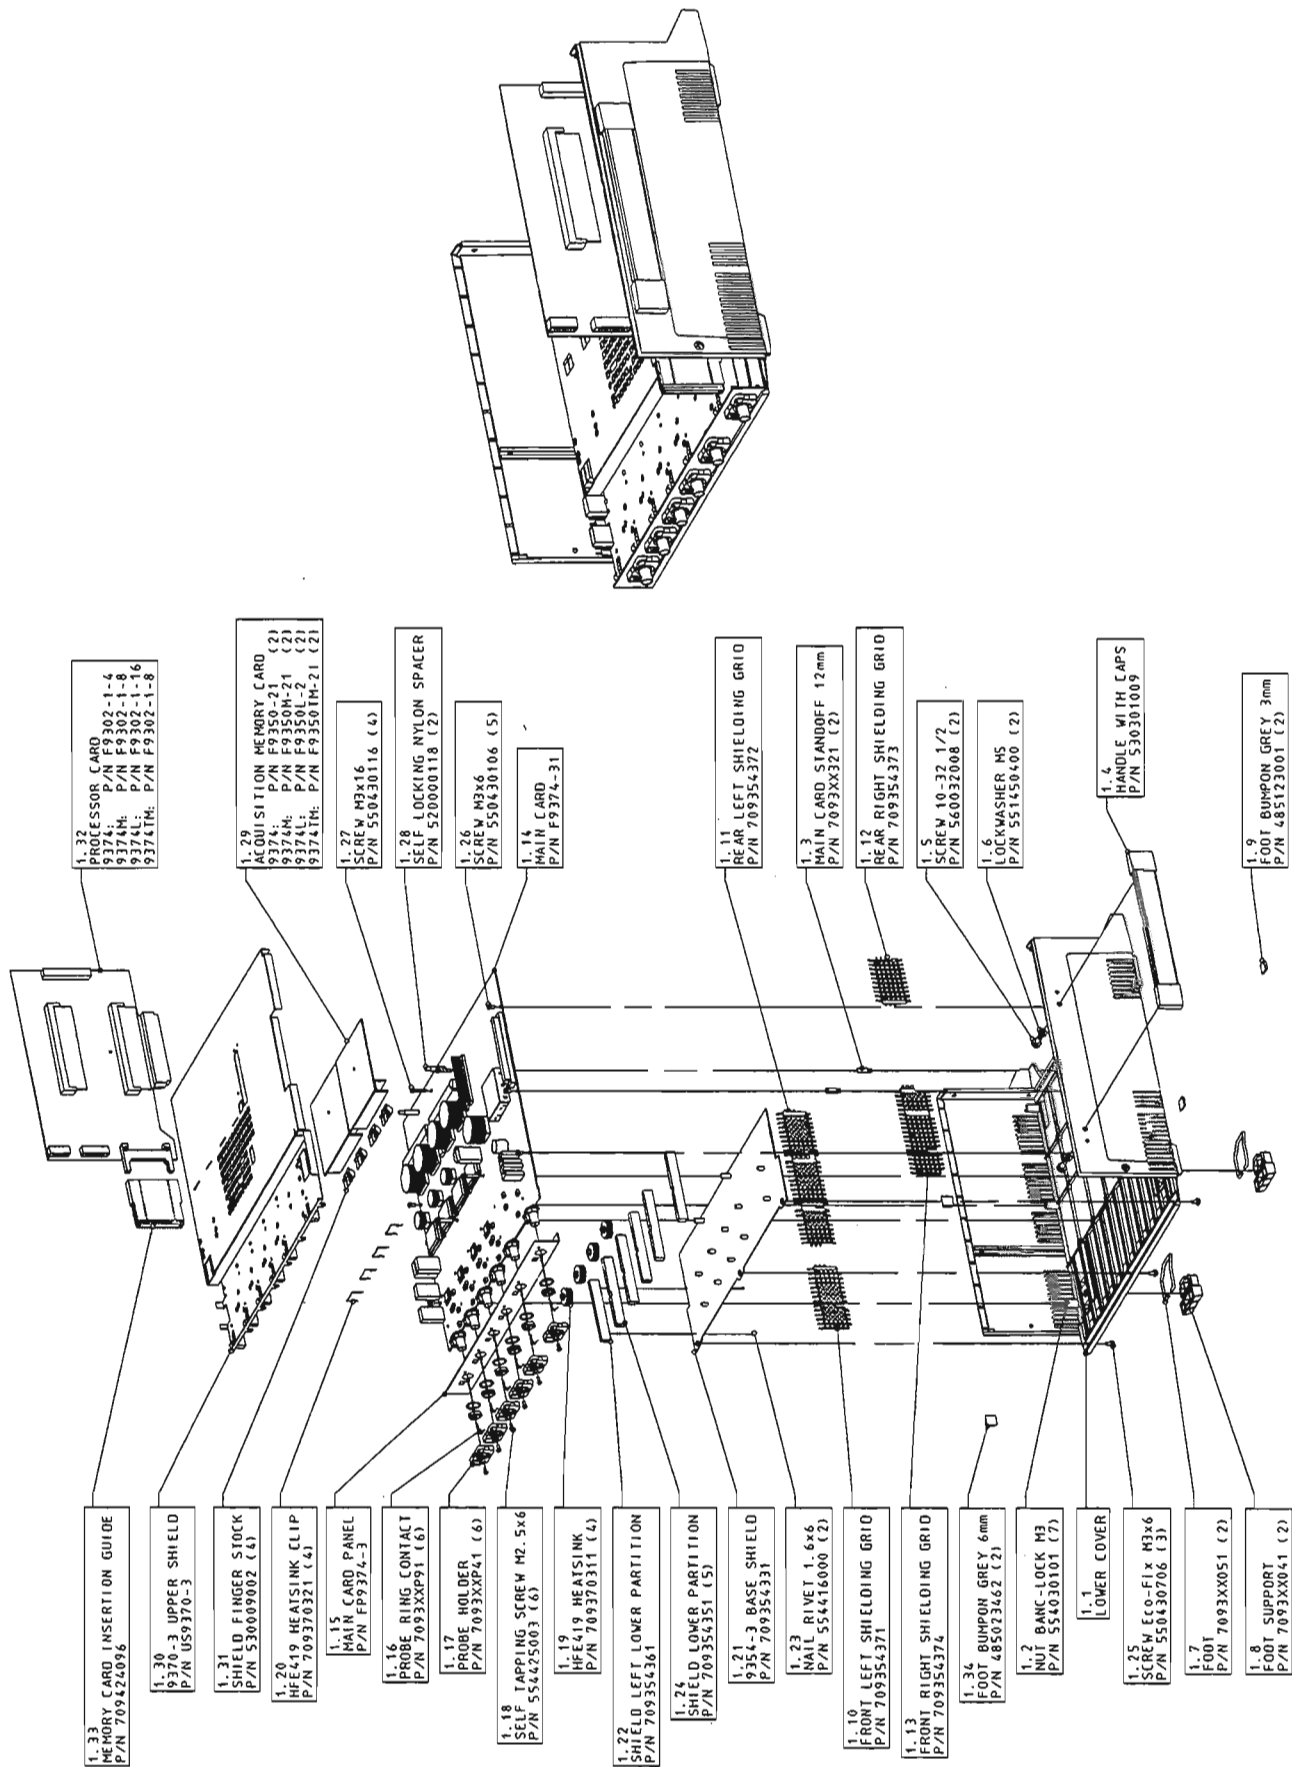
9374/M/L/TM Lower Cover Assembly
